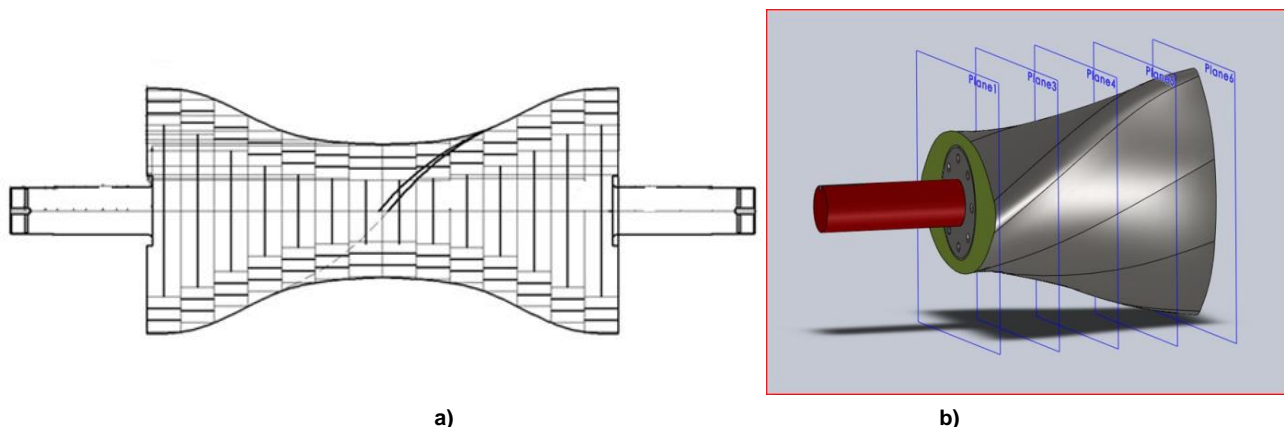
The spindle, divided into 28 blades: a) 2D drawing; b) 3D drawing
